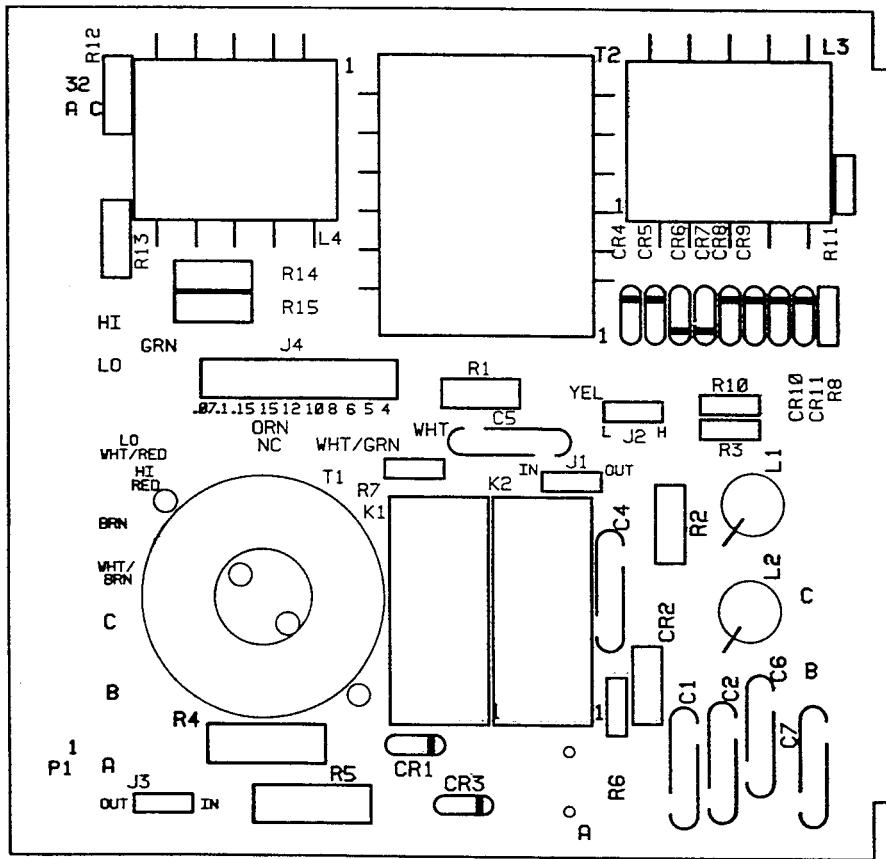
Component locator drawing, RFL 9720 PM input/output module for HCB relays
